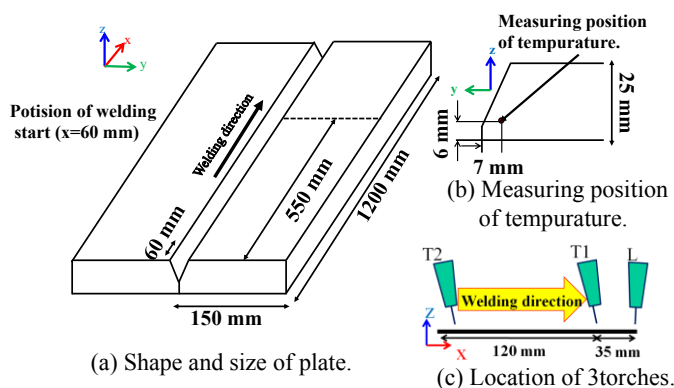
Location of thermo-couple in plate and distance of welding rod.
